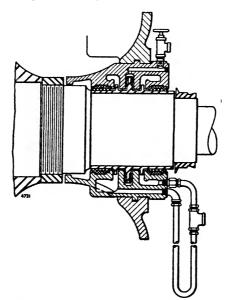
Water-sealed shaft packing. (Courtesy of De Laval Steam Turbine Co.)
